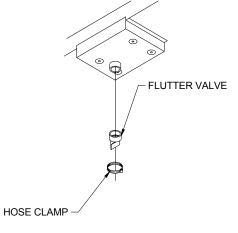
FLUTTER VALVE INSTALLATION
